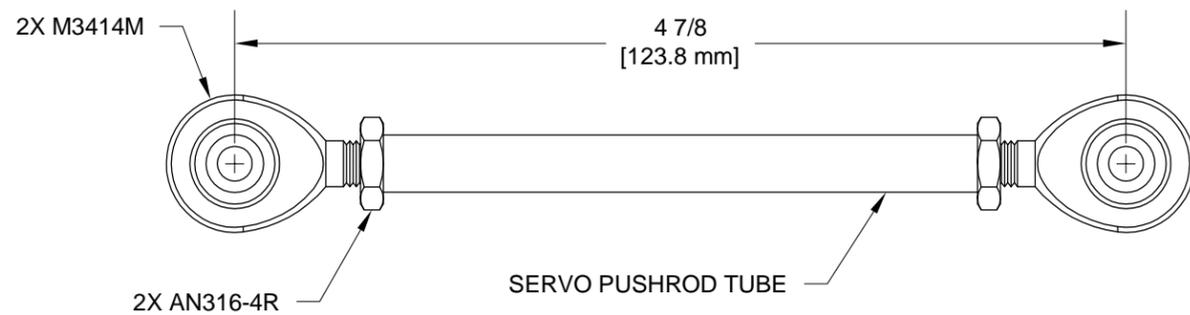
PITCH SERVO PUSHROD ASSEMBLY
